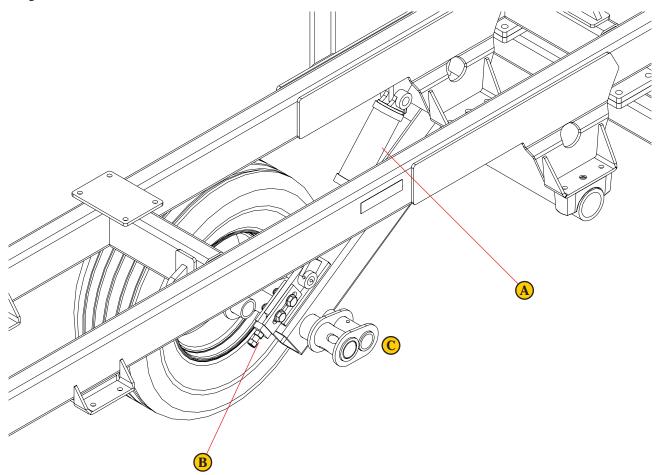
Wing Leveling — Front to Rear & Side to Side
